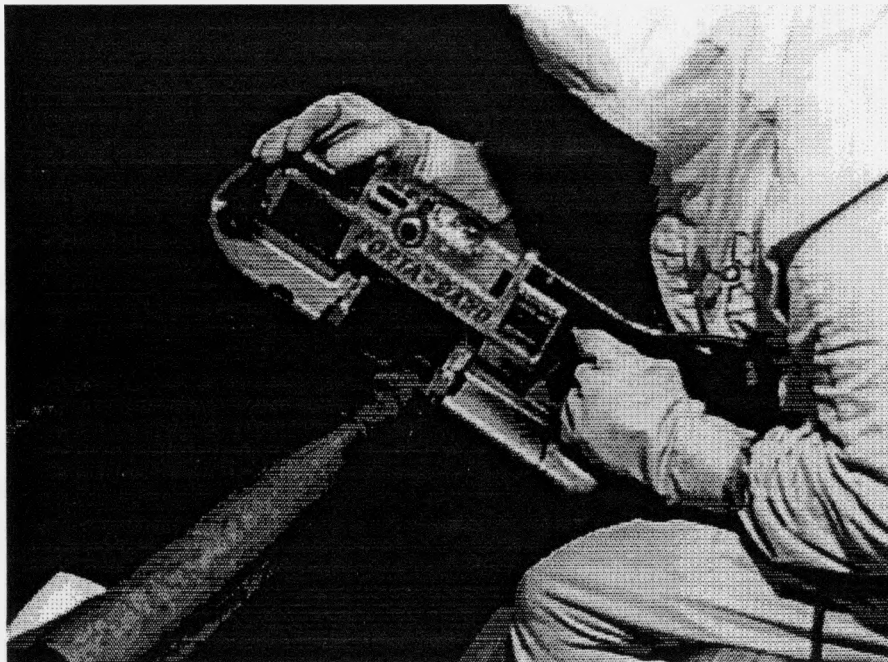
Bandsaw cutting of a two-inch diameter pipe.
